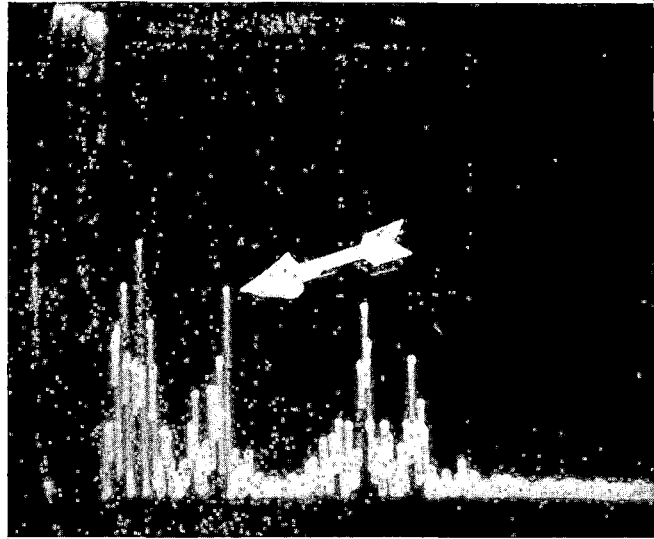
Ultrasonic Inspection Indication of 1.1 cm Crack Pattern
